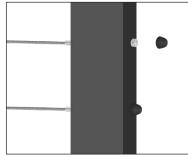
Figure I. Cut the remaining shank flush with the lock nut, then place the cover nut over the assembly.
